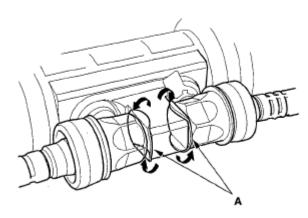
Removing Cylinder Lines And Return Line Joint From Gearbox Courtesy of AMERICAN HONDA MOTOR CO., INC.
